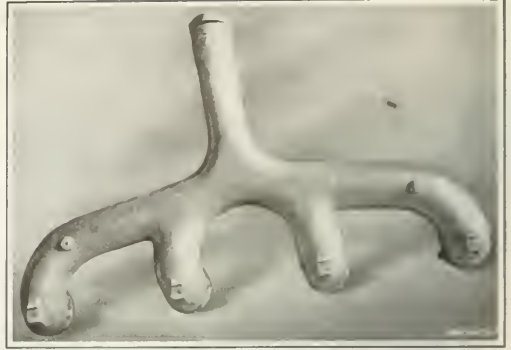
Aluminum Inlet Manifold—Repairs Completed
